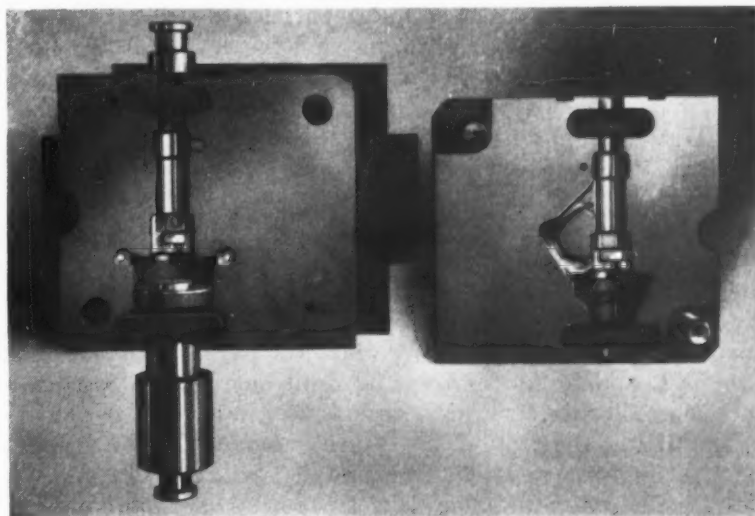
Hydraulic Core-pulling Heads are a Feature of the Dies that Produce the Casting Illustrated in Fig. 3
